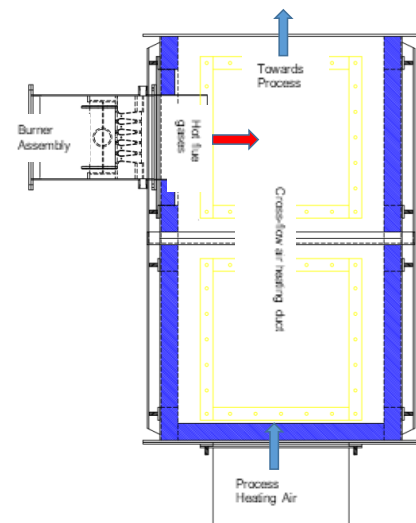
Schematic of complete assembly with burner and cross air flow duct
